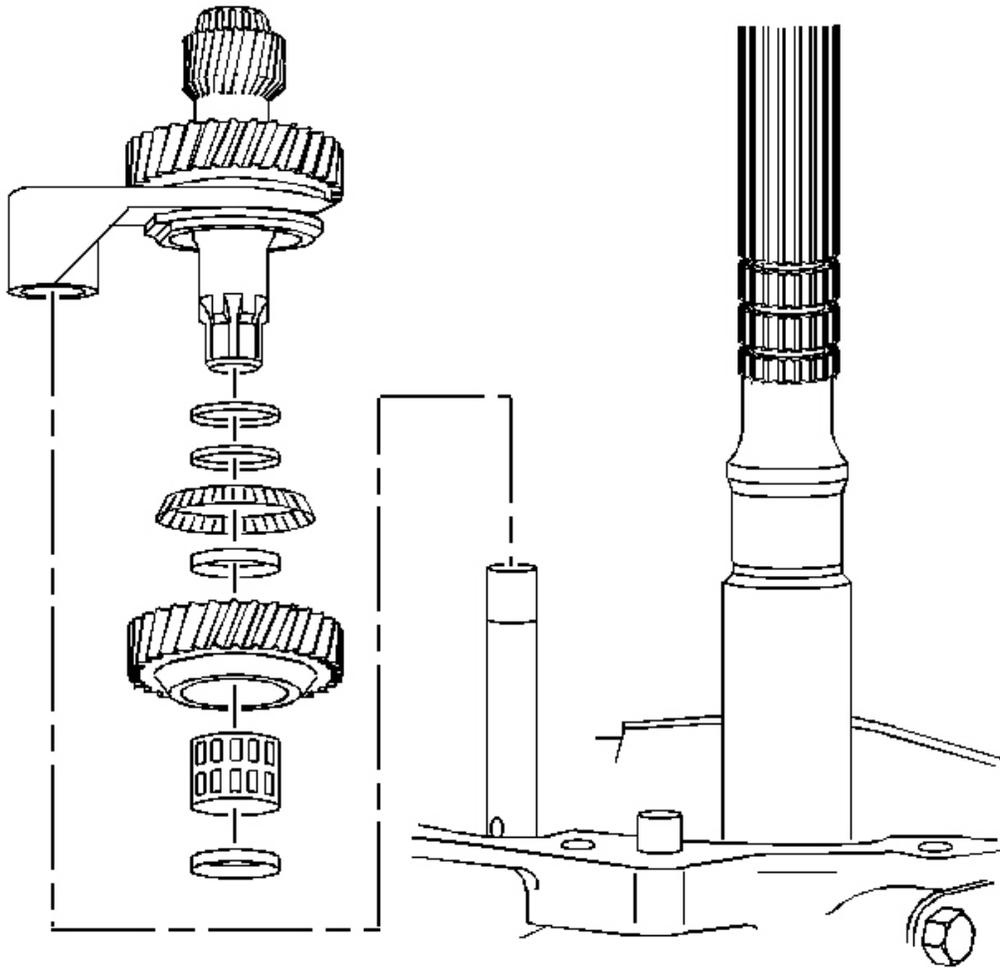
Identifying Countershaft Extension Assembly & 5th/6th Shift Fork
